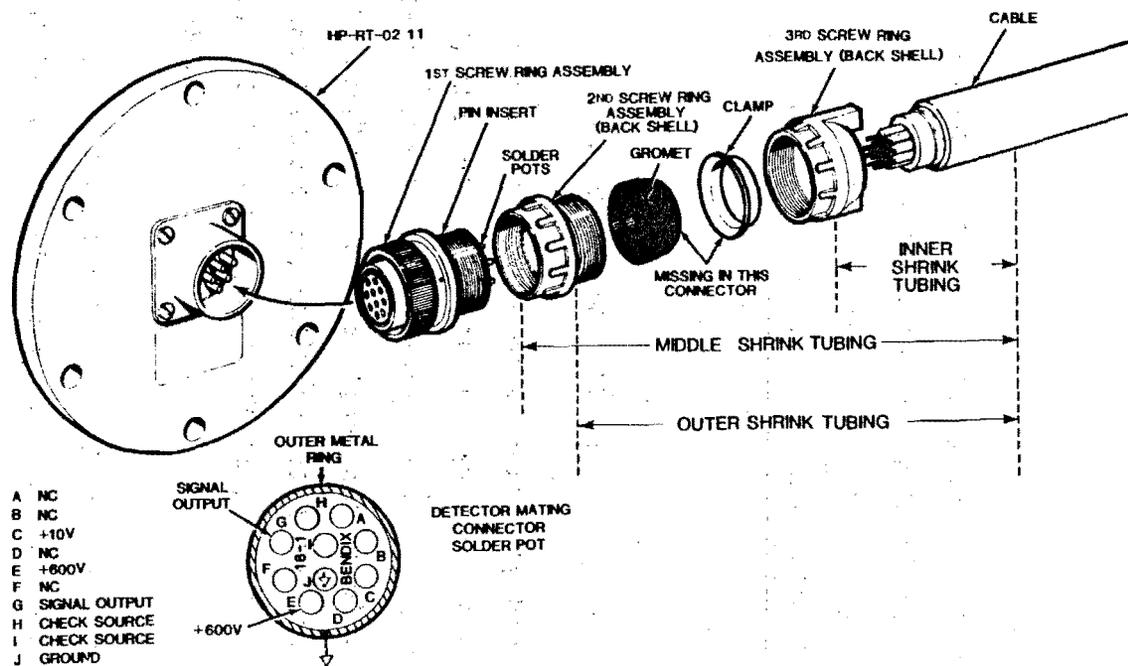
HP-R-211 Connector Assembly. The second screw-ring assembly was apparently not screwed onto the pin insert.
